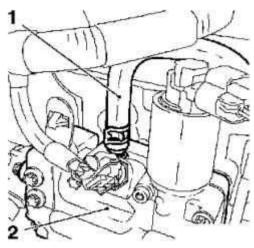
Removing the coolant hose from the thermostat housing: 1 - coolant hose, 2 - housing thermostat
